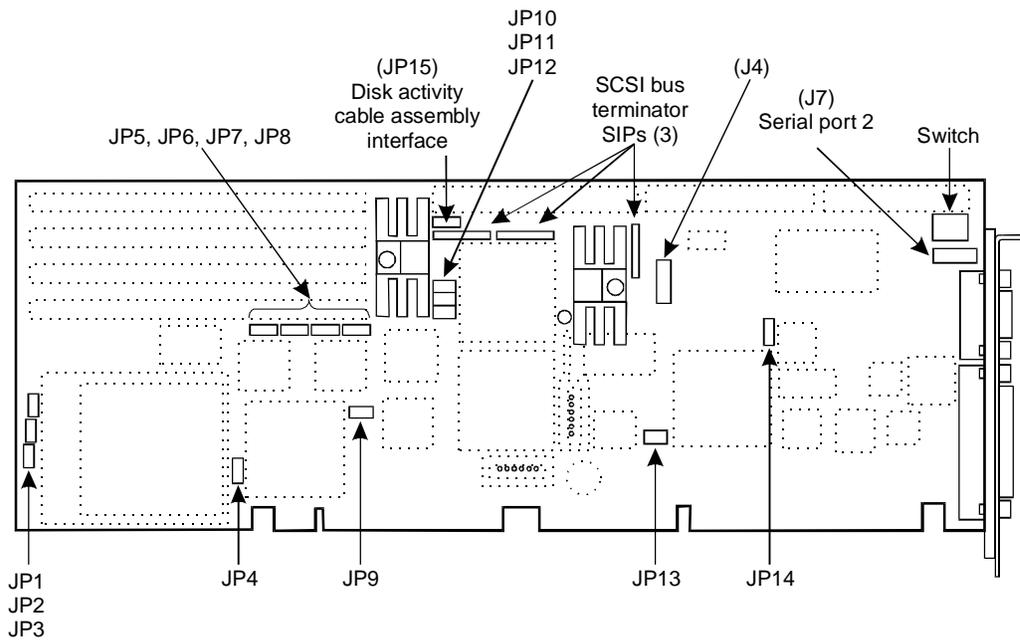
Jumper Settings for the P575/CPU Circuit Card
